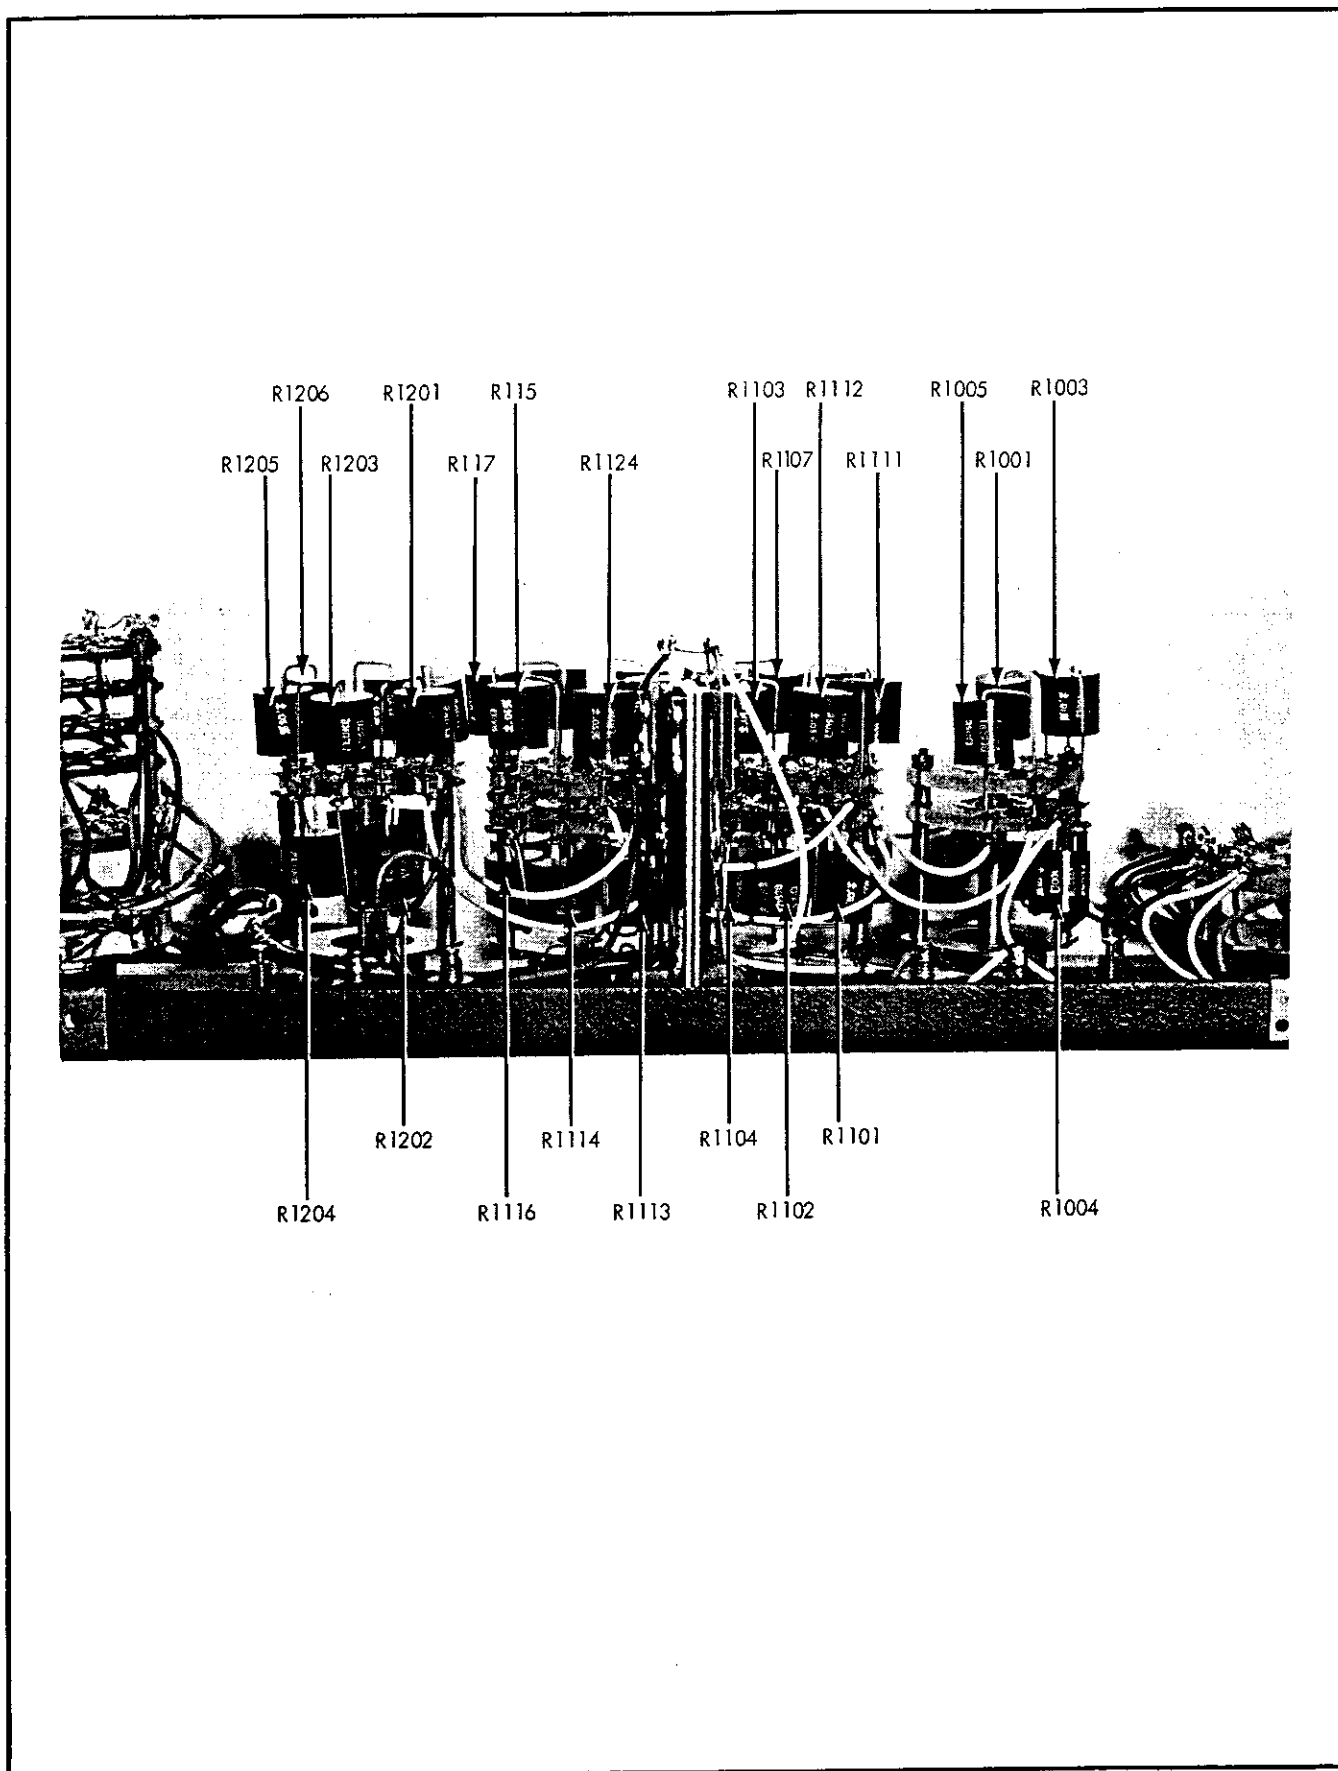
KELVIN-VARLEY SWITCH ASSEMBLIES (Sheet 1 of 2)
